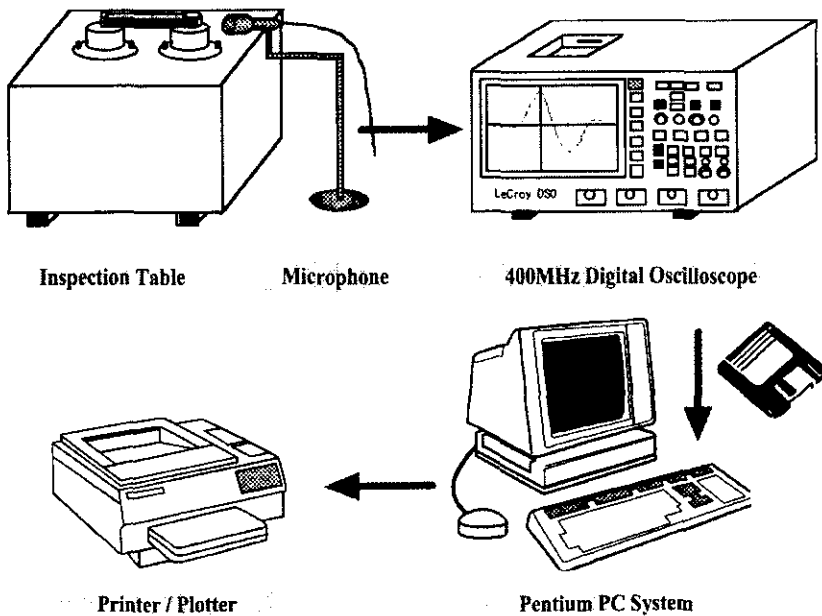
The noise inspection system of the Auto-Transmission for a washing machine
